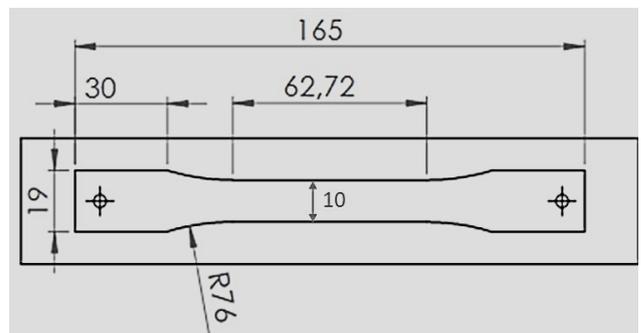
Dimensions of Tensile test samples (Dimension in mm)
